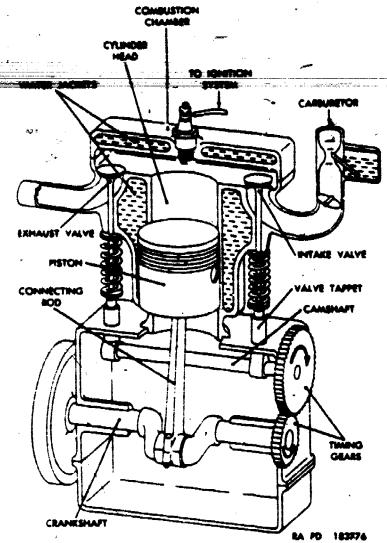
Single-Cylinder, 4-Stroke Cycle, Internal Combustion, Gasoline Engine.
